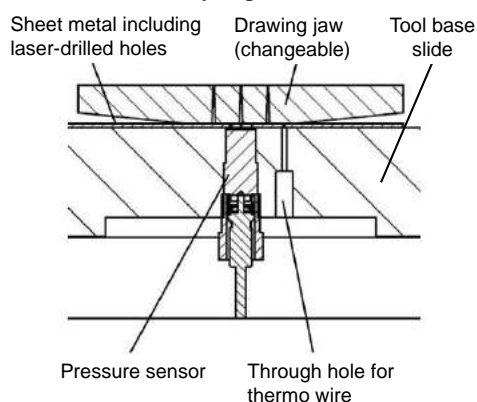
Section of test rig for direct pressure measurements in the contact zone between tool (drawing jaw) and sheet metal.
